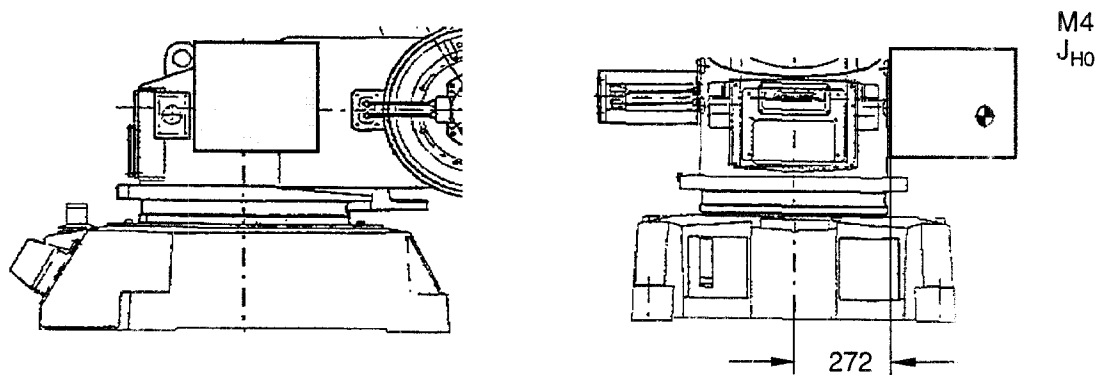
Extra load on frame of IRB 6400S /2.9-120. (dimensions in mm).
